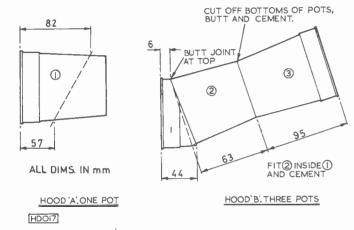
Cutting details of the short hood, using one pot, and the long hood using three.
